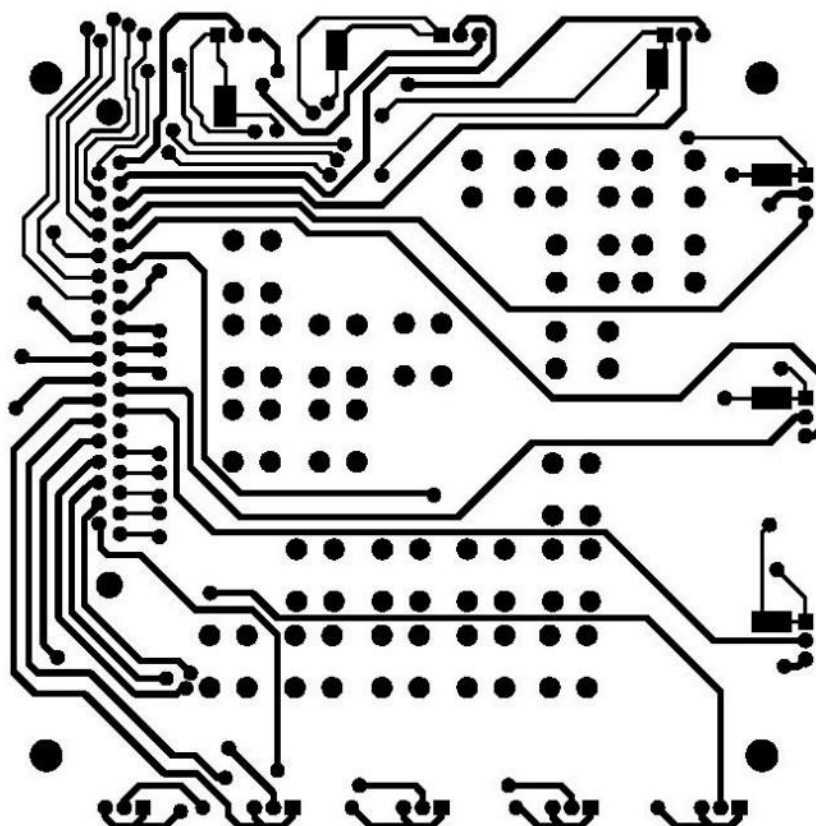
Miniature Semiconductor Measurement Board PCB Mask Bottom
